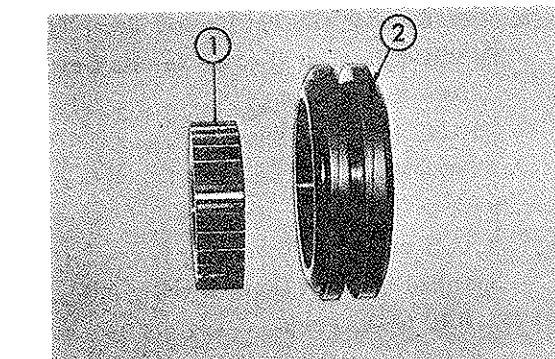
Transfer Front Drive Clutch Hub Installation
